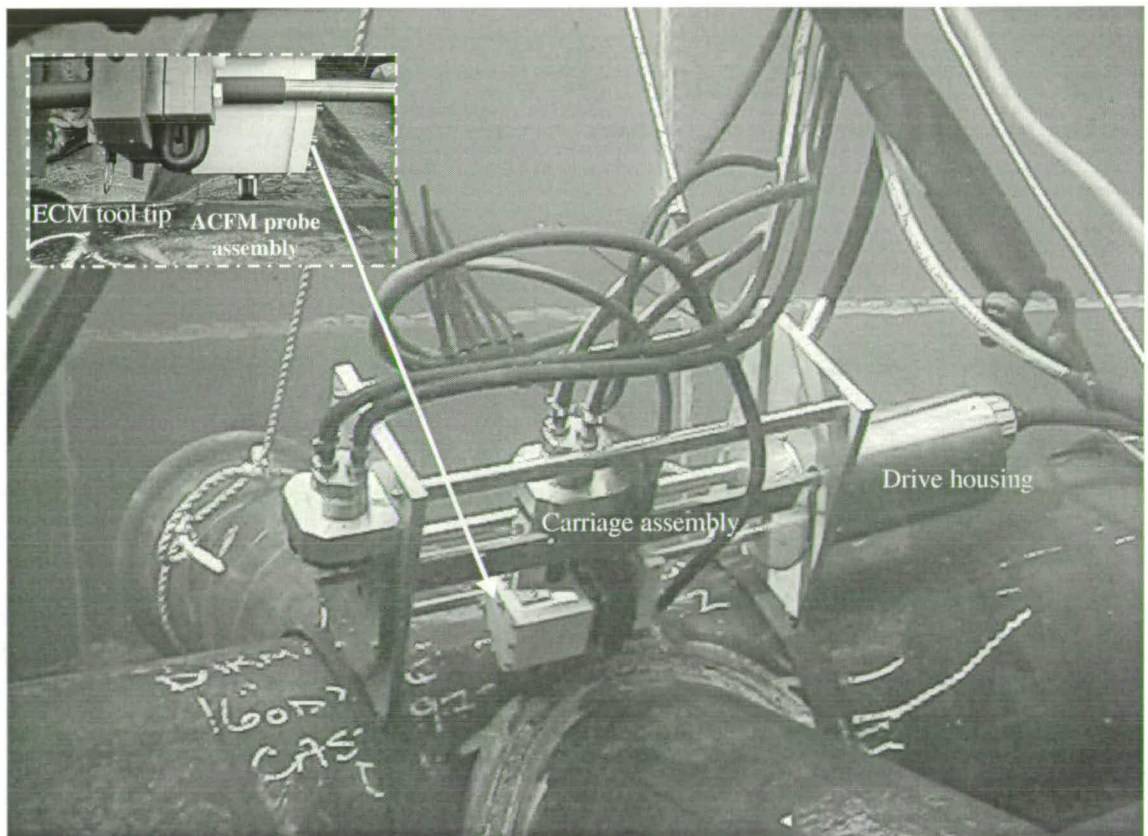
ECM/ACFM system during submersed operation in test tank with insert showing close-up of ECM tool (in retracted position) and ACFM probe (in deployed position) aligned at the weld toe
